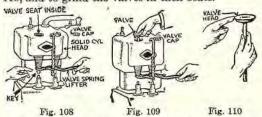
To grind valves in a solid cylinder head, remove the valve caps; remove the pin (or valve retainer) at bottom of the valve stem. A spring lifter is used to compress the spring.
